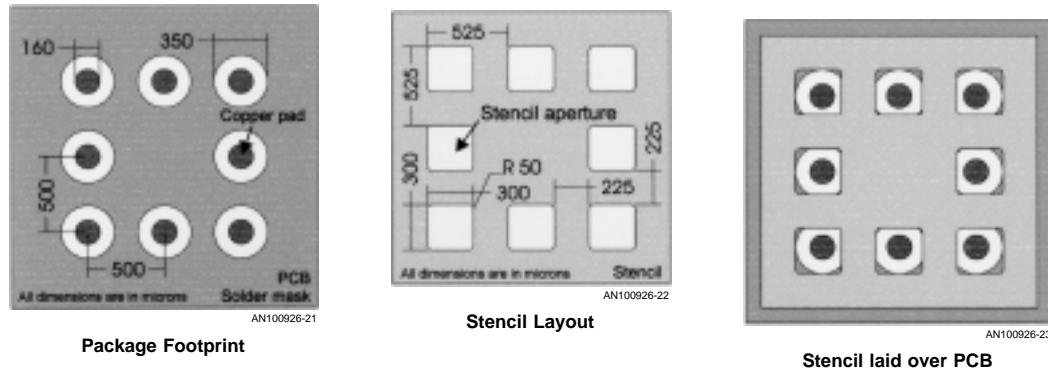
Micro SMD 8 I/O PCB &amp; Stencil Layout
